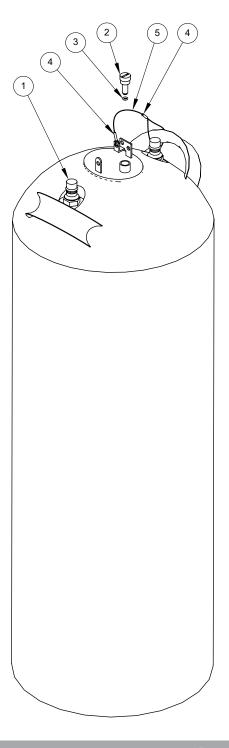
15 Gallon Chemical Jug Assembly D-6163 Rev -
